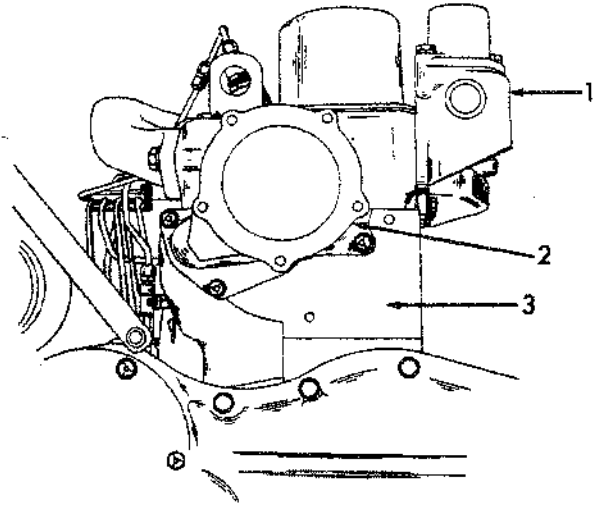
Water Pump Volute Installed (Model 3400) (T-51281)
